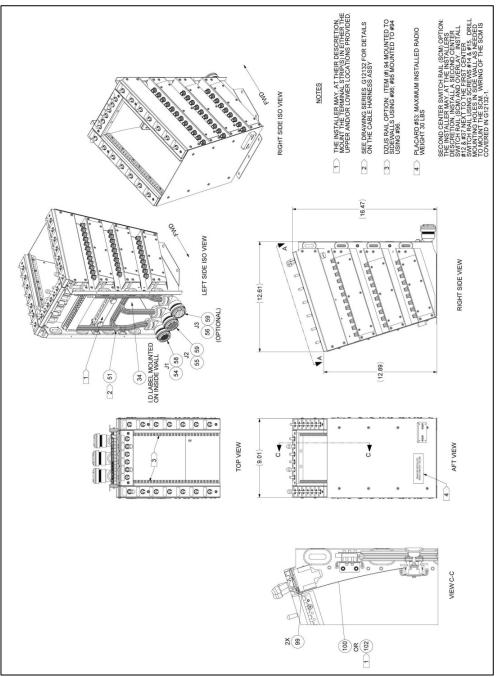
P132 CONSOLE, ASSEMBLED (G10251)
